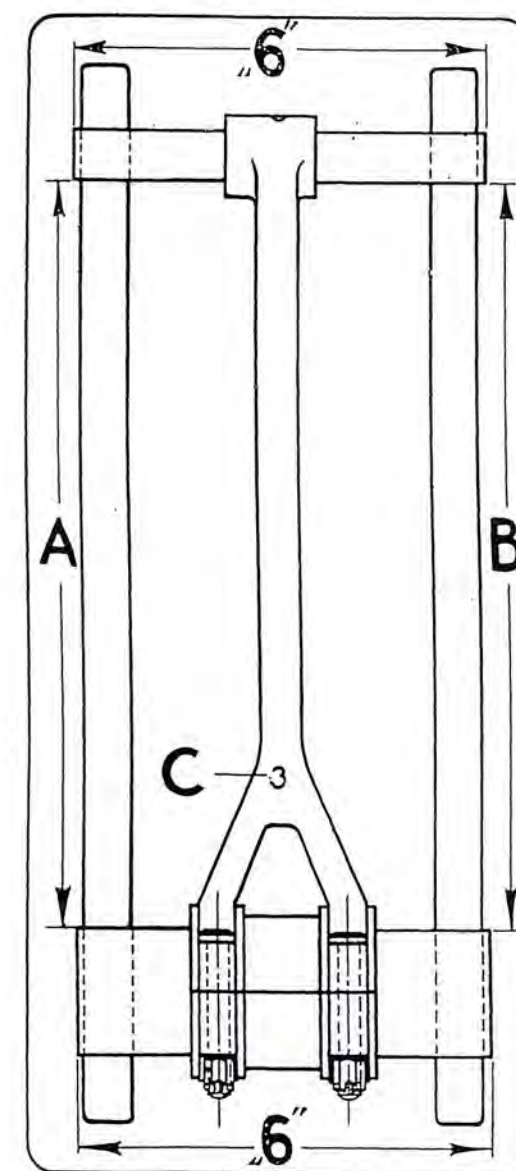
Method Employed in Testing Alignment of Forked Connecting Rods.
